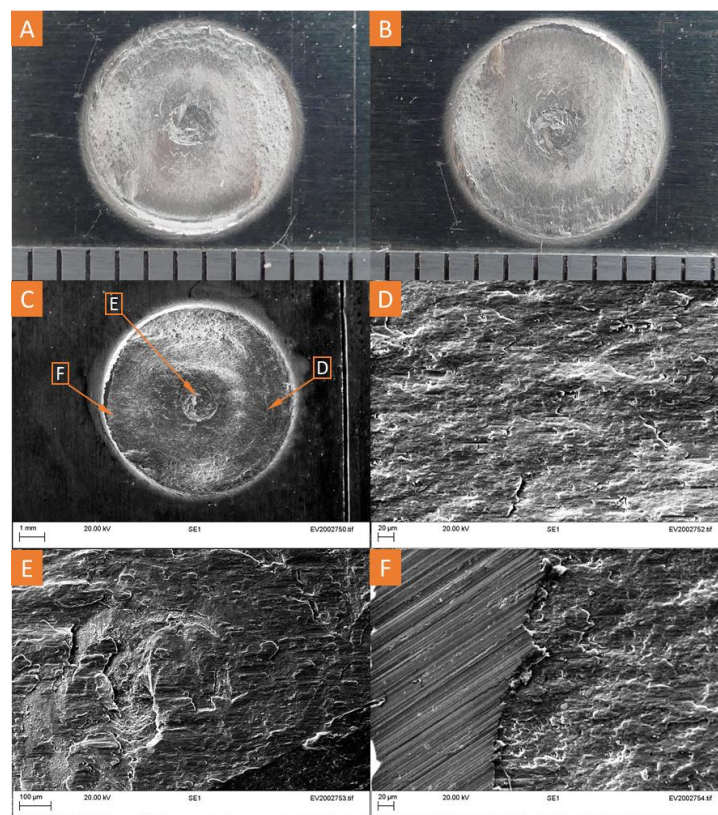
Fracture surfaces of RFSSW AA2024-T3 using Tool 1:
